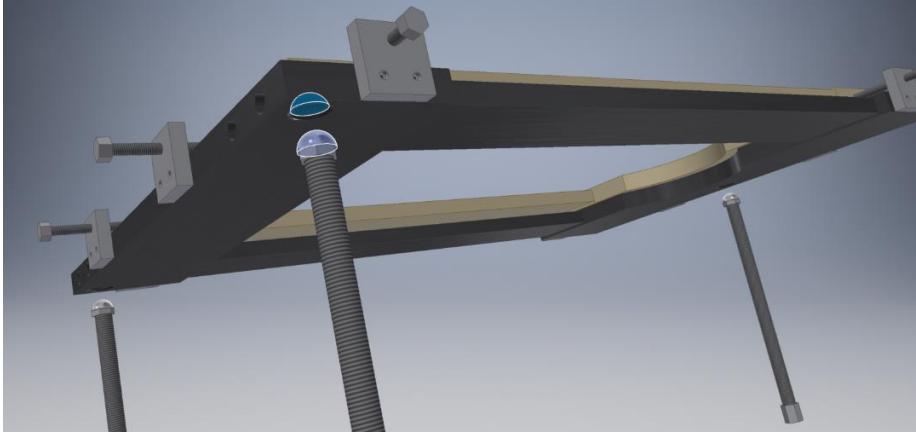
Close-up of how the adjustable plates are supported with the spherical washer capped rods in a triangular pattern. The spherical cap fits into a dimple on the bottom of the lower plates.
